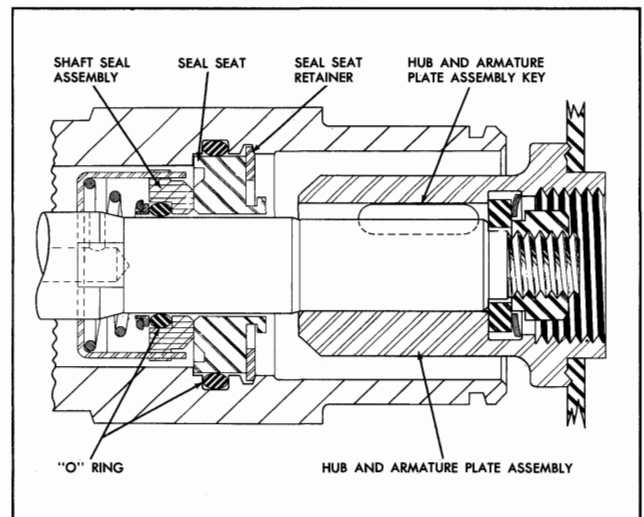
Cross Section - Compressor Shaft Seal Area
